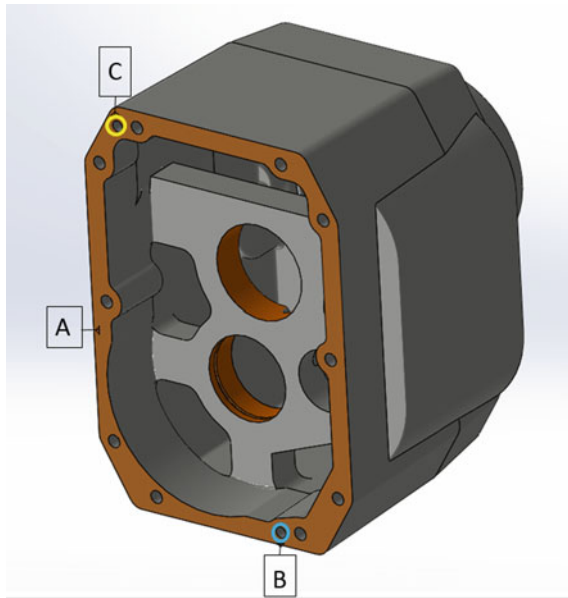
The datum reference frame defined on the gearbox case
